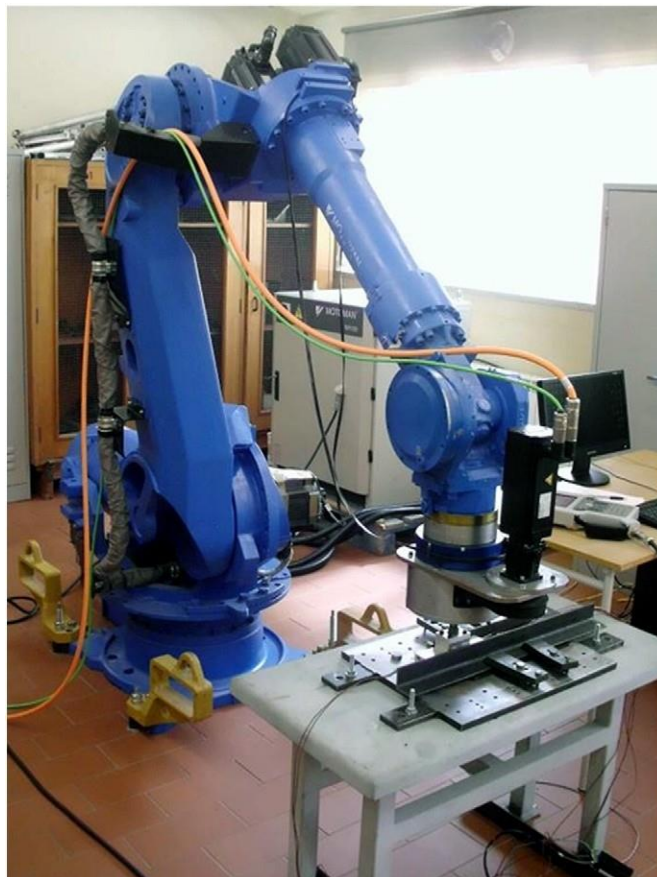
articulated arm robot performing FSW at the university of Coimbra [54].
